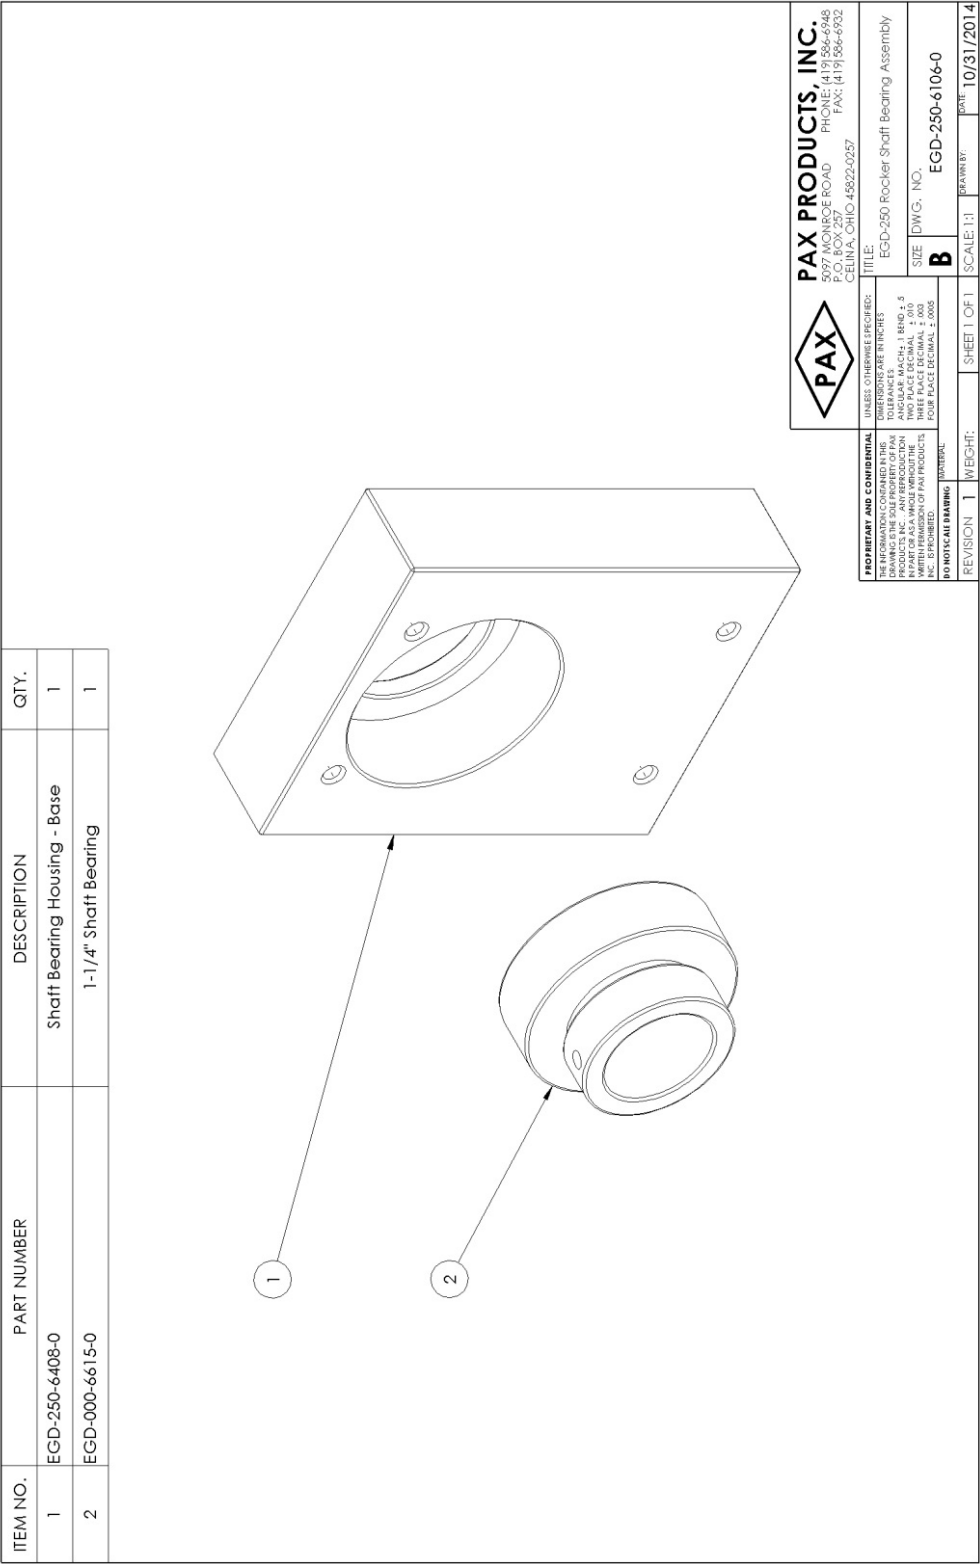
EGD-250 ROCKER SHAFT BEARING ASSEMBLY
